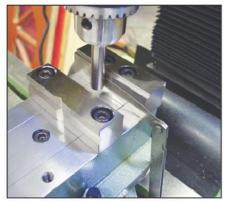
Feeler gauge is lightly nipped between bar and vice.
